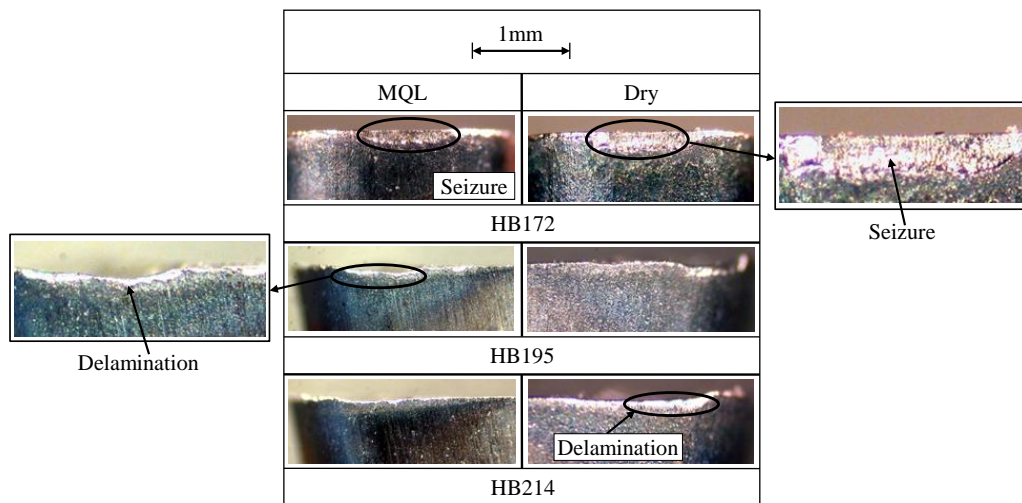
Conditions of maximum flank wear (SCM435, T15, cutting speed: 86 m/min, cutting length of groove: 8 m)
